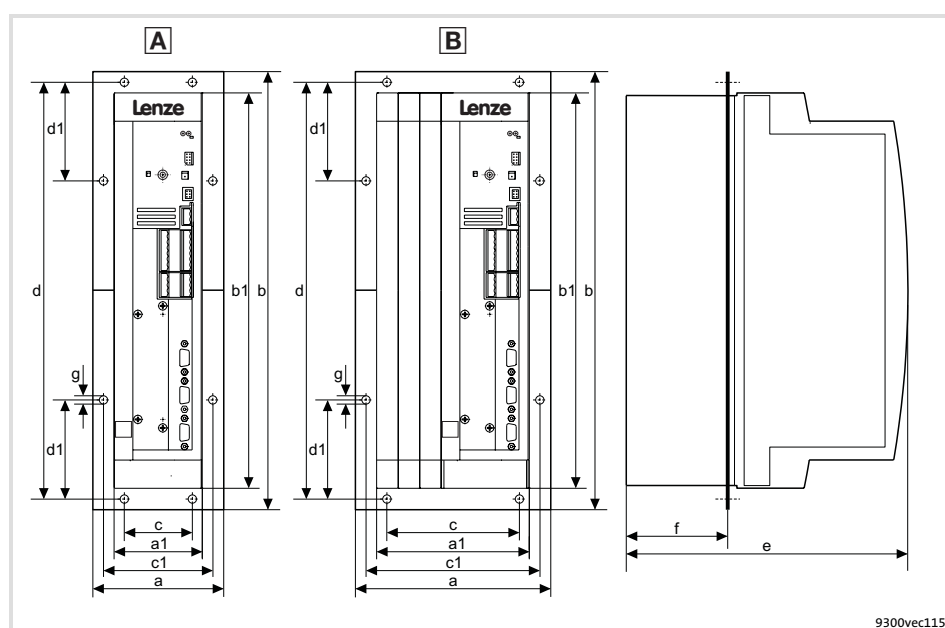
Dimensions for thermally separated mounting 0.37 ... 11 kW
